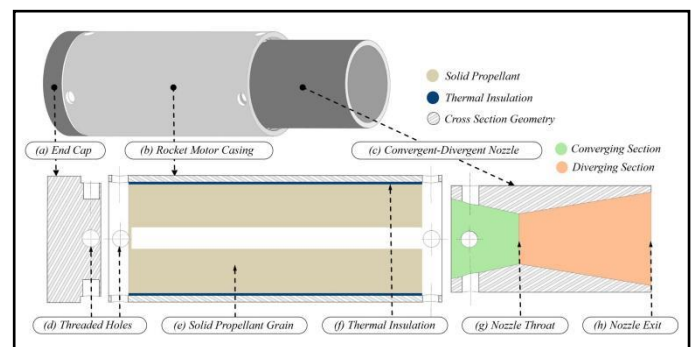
Rocket Motor Casing, End Cap & CD Nozzle (CS)
